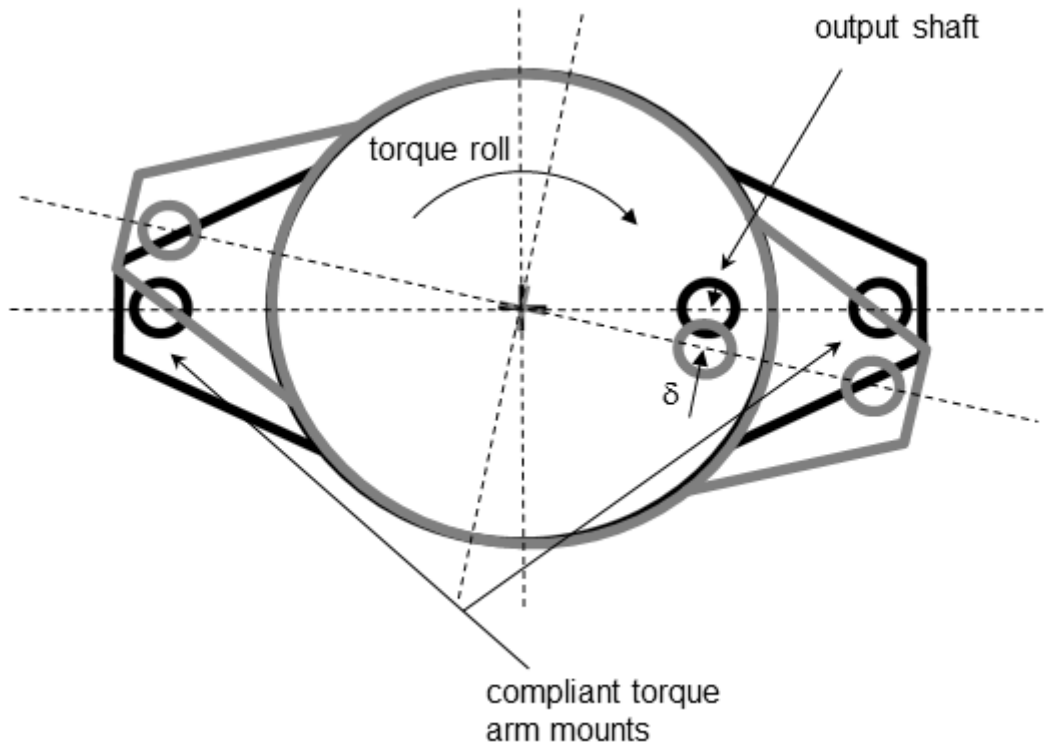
Displacement of gearbox under load induces gearbox-generator misalignment which is that bearings ultimately fail under rolling contact fatigue.
